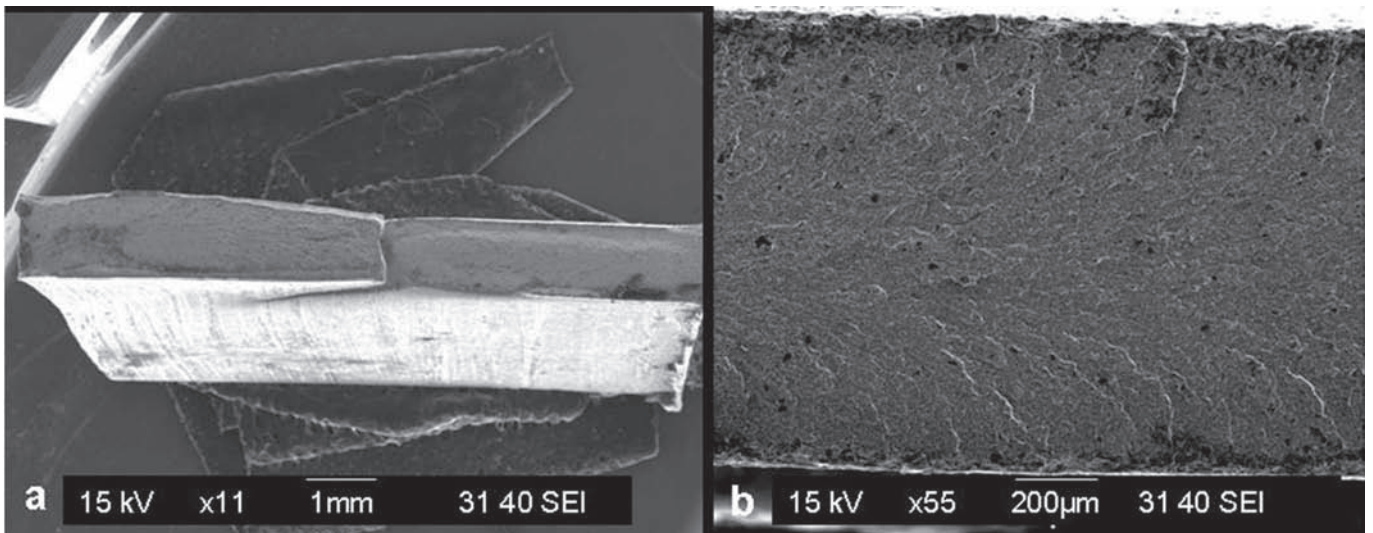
Overall view of the fracture surfaces; (b) brittle fracture appearance typical of cleavage with what seemed to be river markings.
